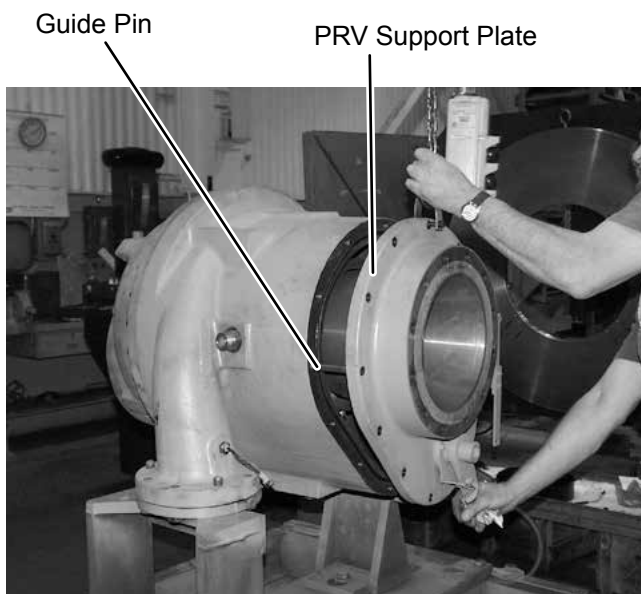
INTERNAL PARTS - PRE-ROTATION VANE ASSEMBLY
